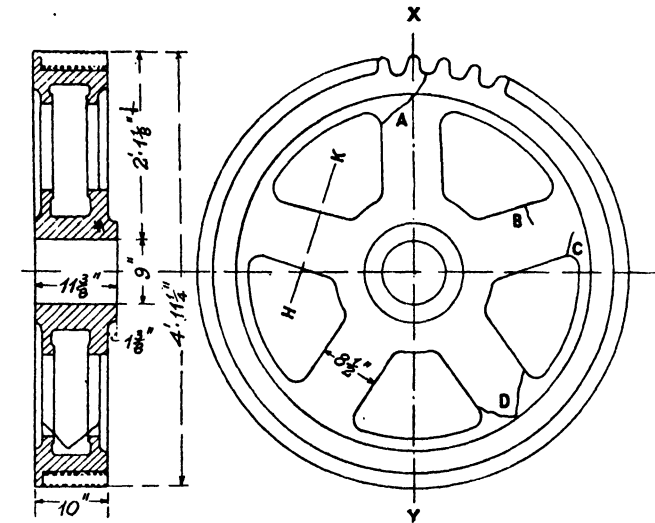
FRACTURED LOCOMOTIVE WHEEL WITH SPOKES REPAIRED AND REINFORCED BY THE ELECTRIC ARC WELDING PROCESS.
